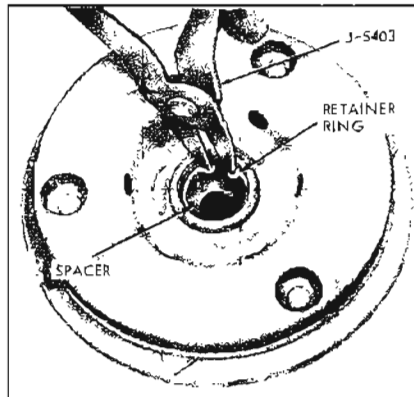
Removing or Installing Retainer Ring in Clutch Drive Plate
